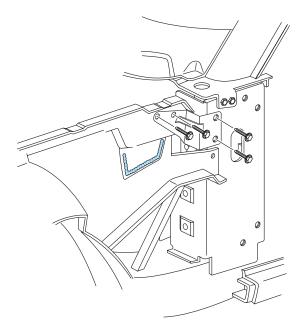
Remove Bolts Attaching Brace to Hinge Pillar
